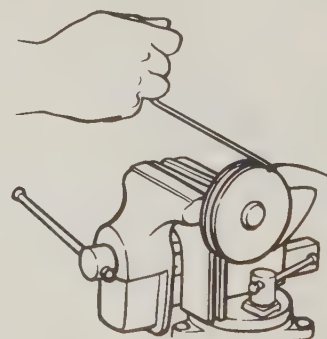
Winding the new spring into the cover. (Evinrude Motors Division of Outboard Marine Corporation)
